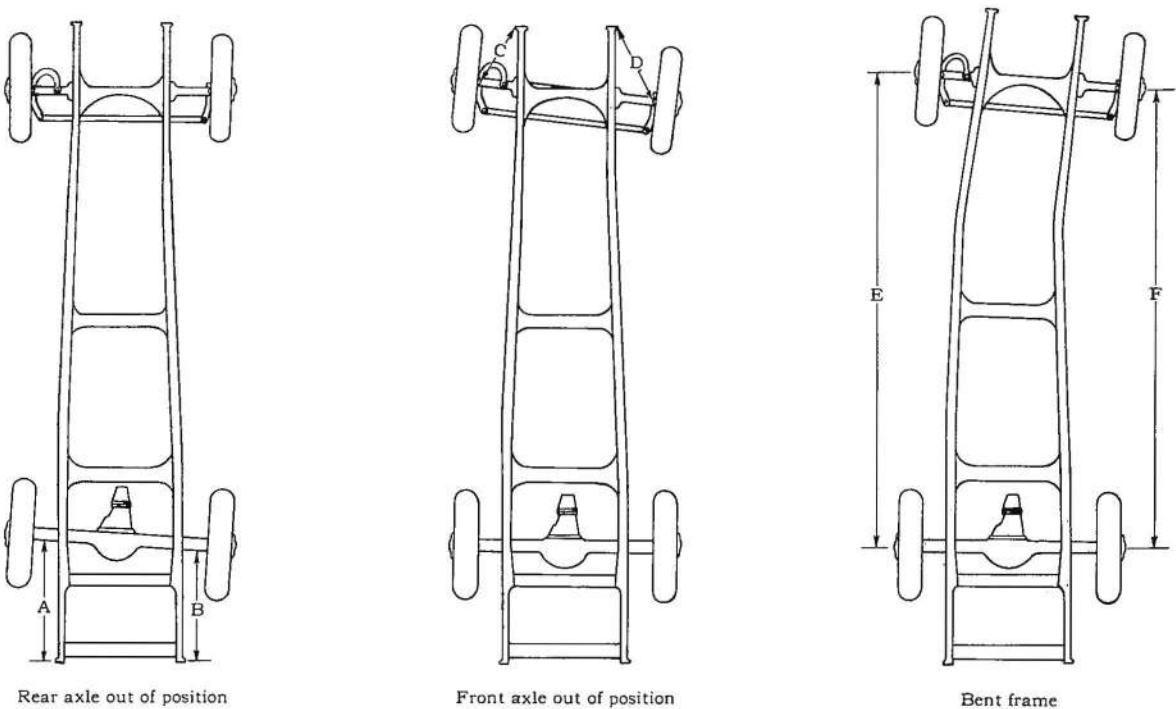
To insure tracking of the rear wheels with the front ones the front and rear axles must be in the correct position and the frame straight. The dimensions "A" and "B" will be alike if the rear axle is straight and in the proper position. With the front axle straight and in the proper position the dimensions "C" and "D" will be alike. The dimensions "E" and "F" should also be alike; if they are not the same and both axles are straight and in the correct position with the front and rear of frame a bent frame is indicated
